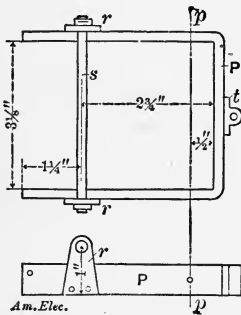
ELEVATION AND PLAN OF ARMATURE.
